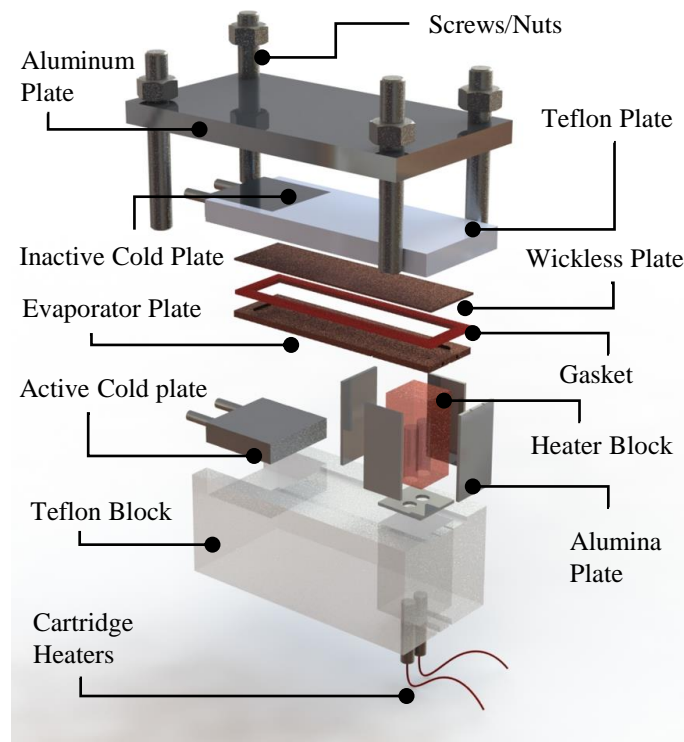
Exploded view of the experimental setup, displaying the assembly of various employed components. The Teflon Block is displayed transparent to expose the nested parts.
